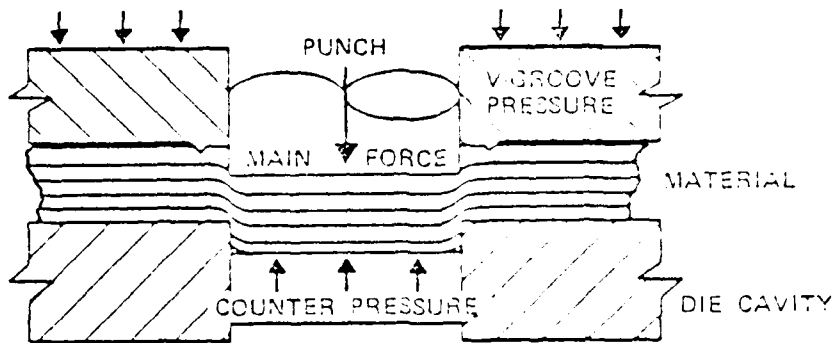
Cross-sectional view of a fine blanking die fabricating a part.
